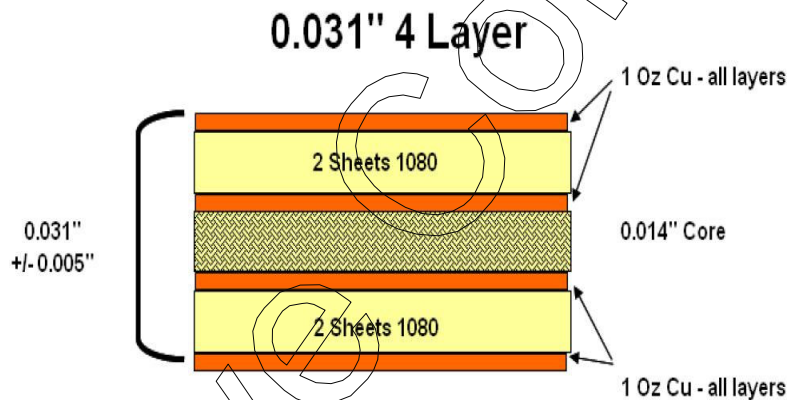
Vendor standard stack-up of 4-layer PCB with 31 mil thickness
